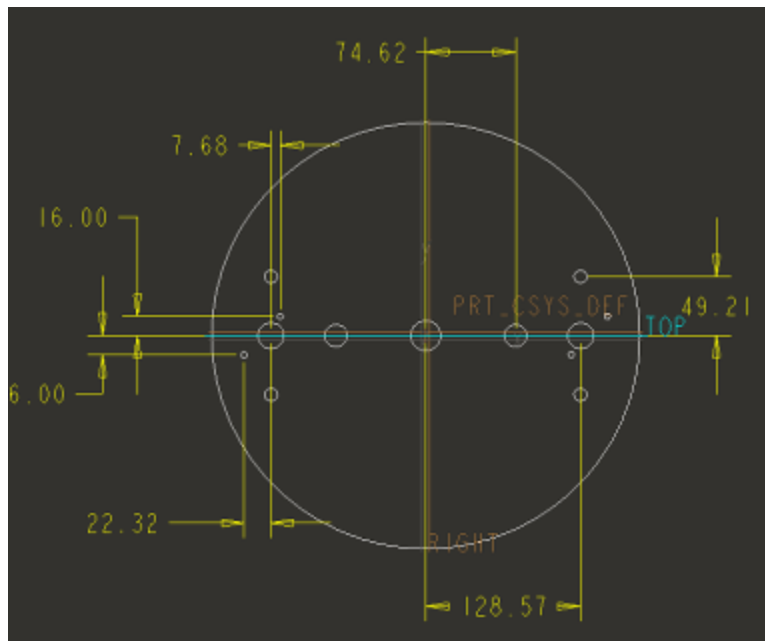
CAD of super bracket hole centers (all dimensions in mm)
